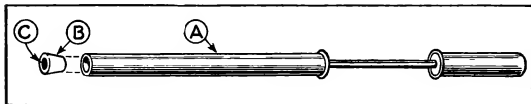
(A) Pump barrel. (B) Cork. (C) Hole drilled in end of cork to admit cable housing.
